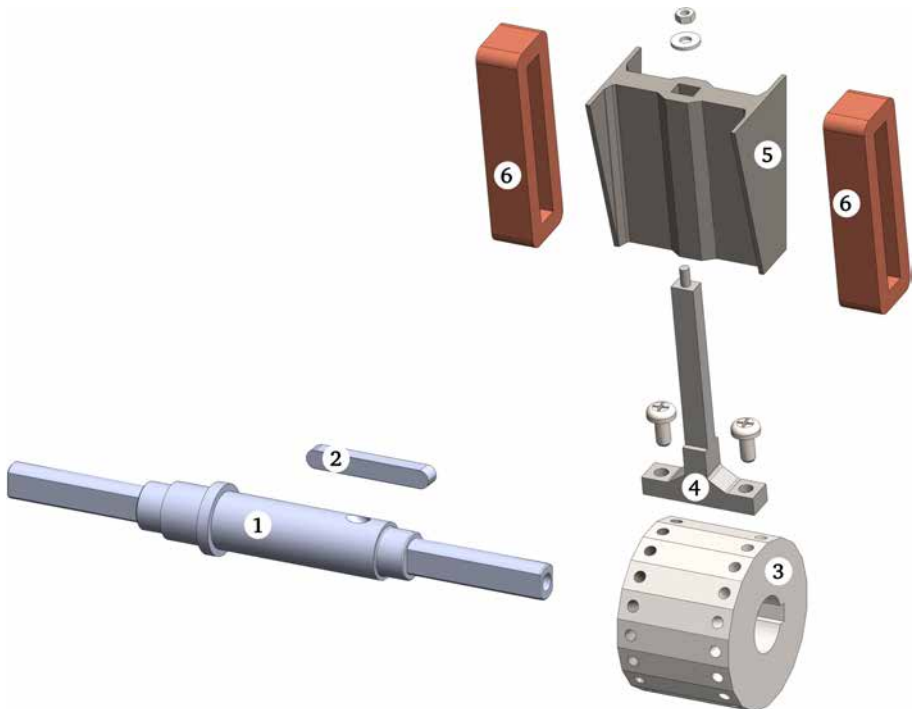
The exploded view of the revised design of assembly for mounting segmented stator tooth (1. Shaft, 2. shaft key, 3. hub, 4. tooth holder, 5. segmented stator tooth, and 6. coils).
